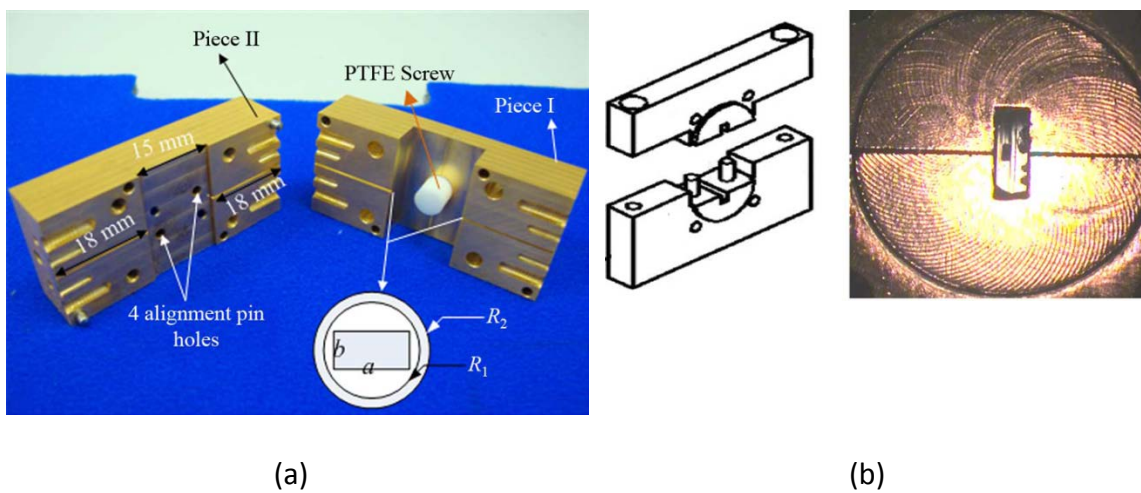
Examples of test fixtures for characterization of micromachined components [64, 74]
